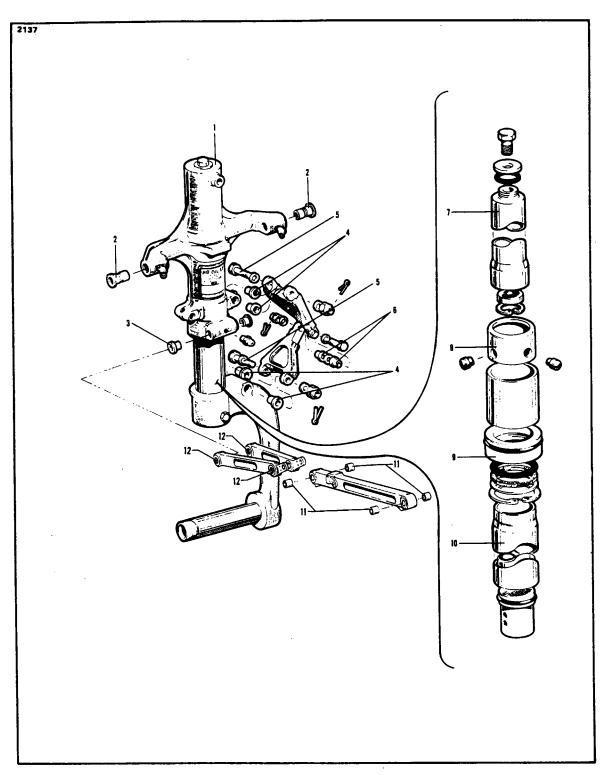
Main Gear Oleo Service Tolerances
